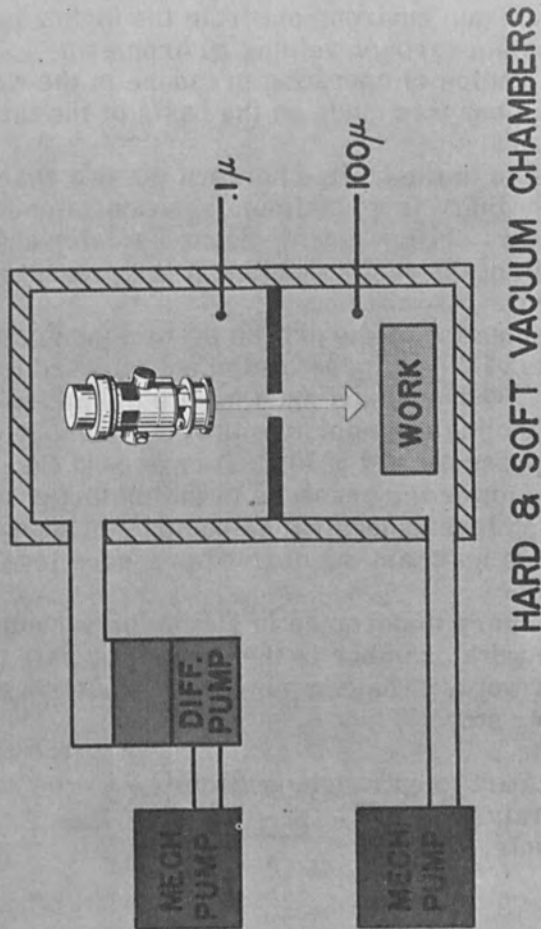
Schematic Illustration of Medium Vacuum Welding Equipment.
